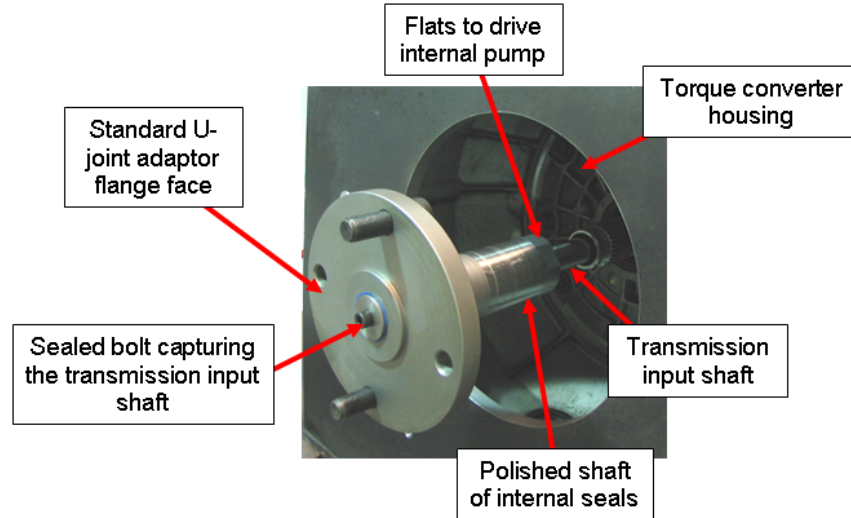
Automatic transmission torque converter replacement shaft assembly
